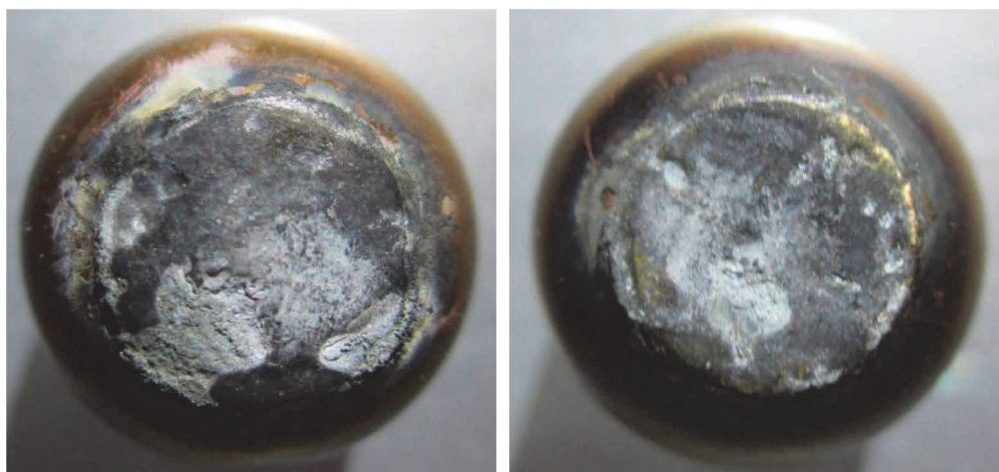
Zinc on work surface of welding electrode (left - upper cap, right - lower cap)
